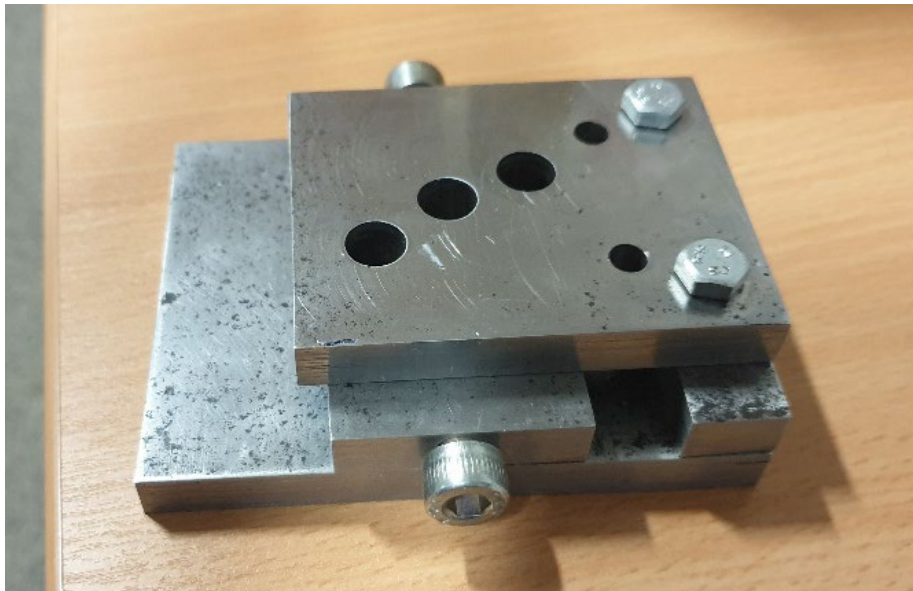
showing the front support block and the two side supports components, prior to finishing.
